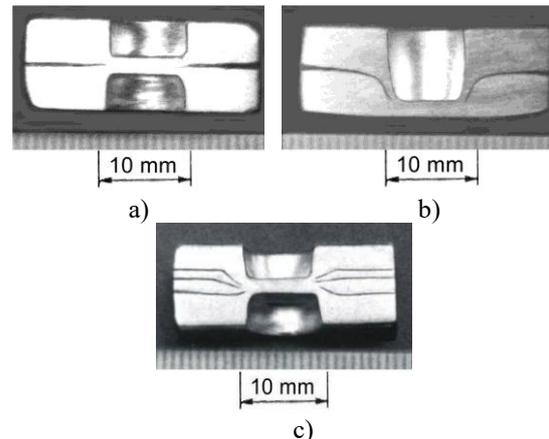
Macroscopic aspect of aluminium specimens welded by cold pressure welding
